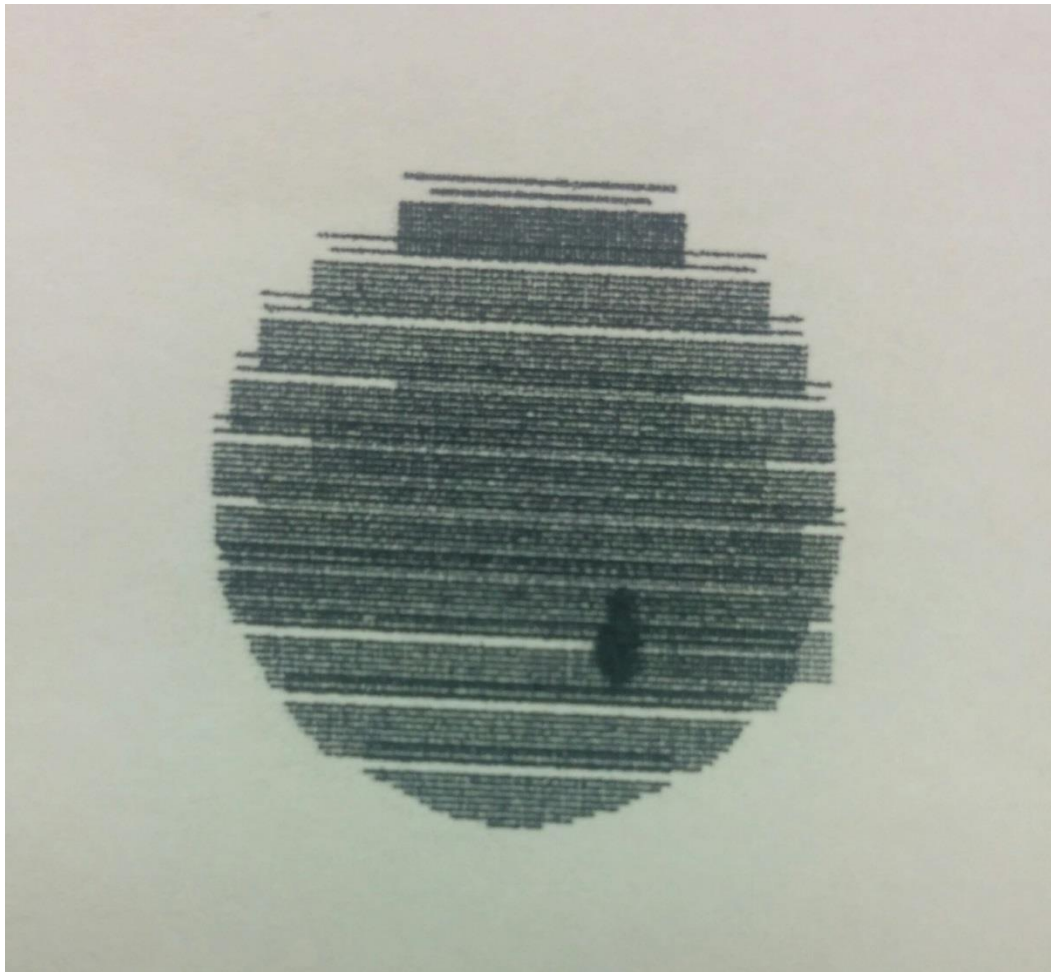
Test print showing print head location issues. Layer 2 can be seen within the first layer
